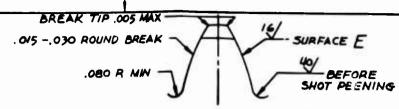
Fatigue Test Gear Configuration 3—EX-78774.
